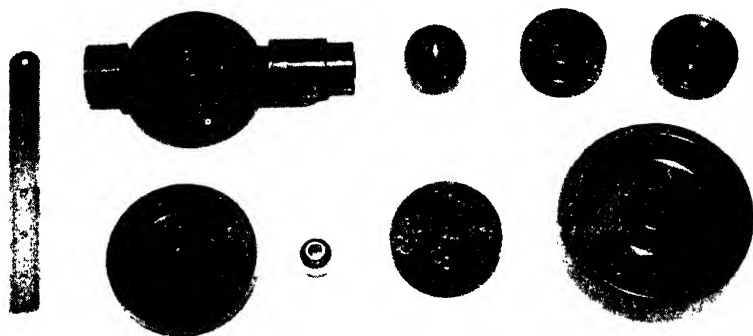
Phillips and Powis mouldings, replacing metal parts.
